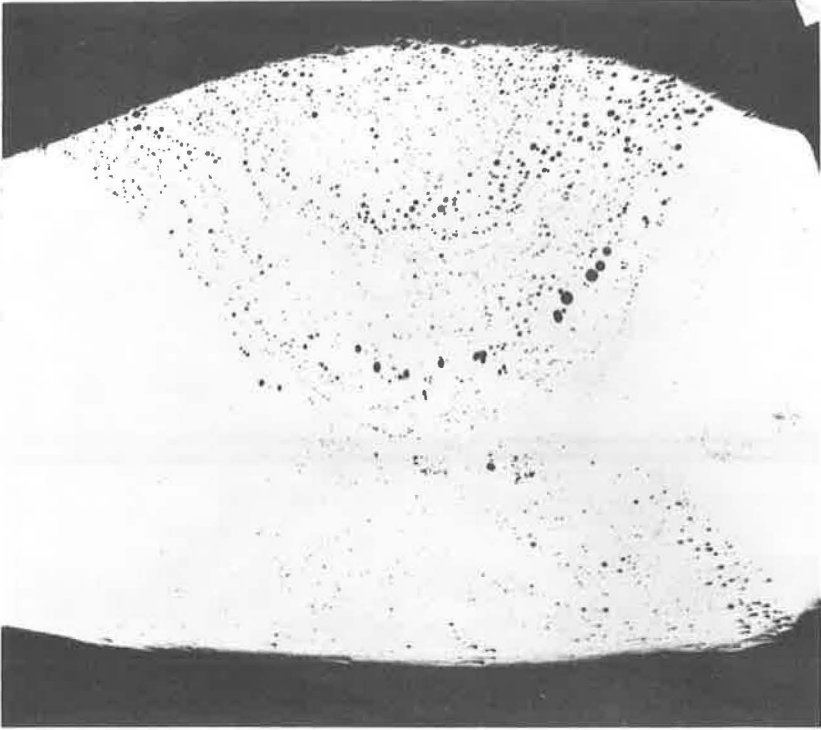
Macrograph showing porosity in a TIG weld in $\frac{1}{2}$ -in. 2219-T87 plate (S-278462, mag. 5X, as-polished).
